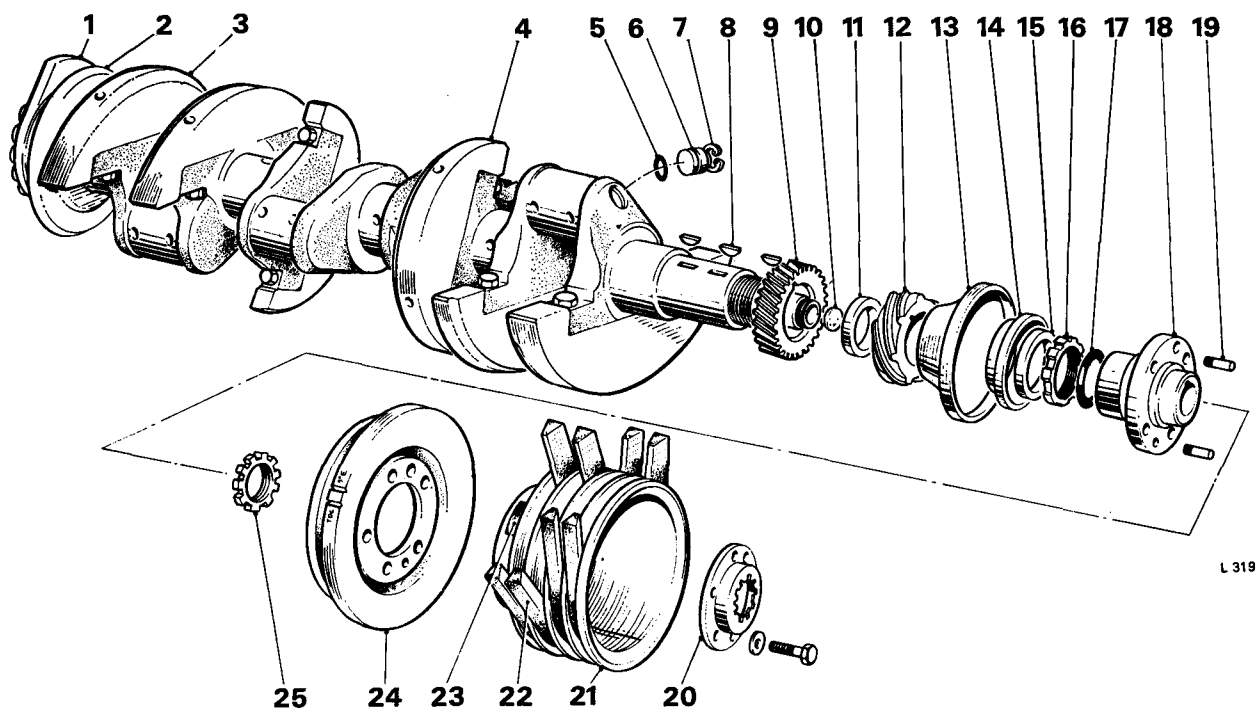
EXPLODED VIEW OF CRANKSHAFT 9.90 cm. (3.900 ins.) STROKE ENGINE
